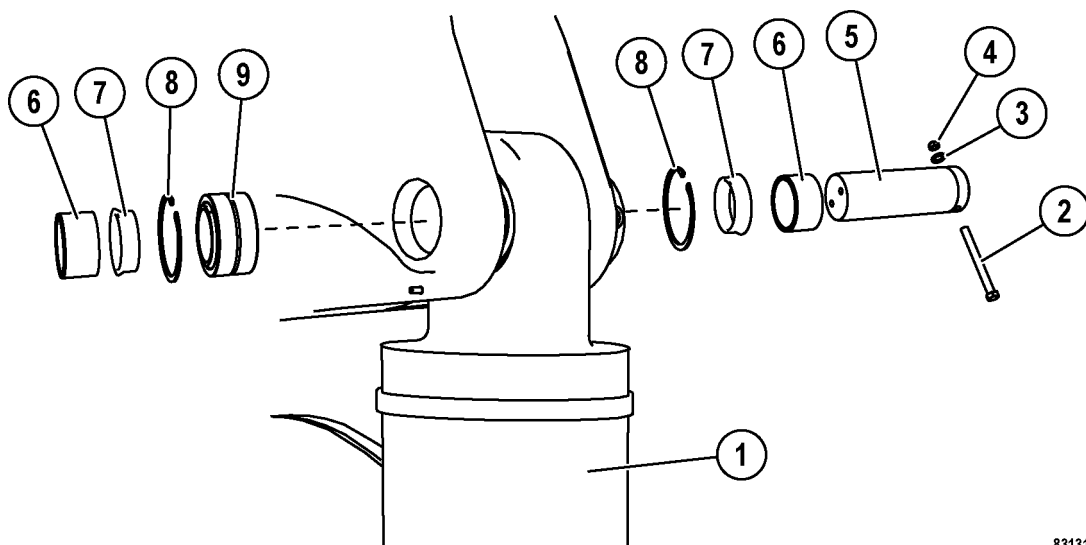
REAR SUSPENSION CYLINDER PIN INSTALLATION
